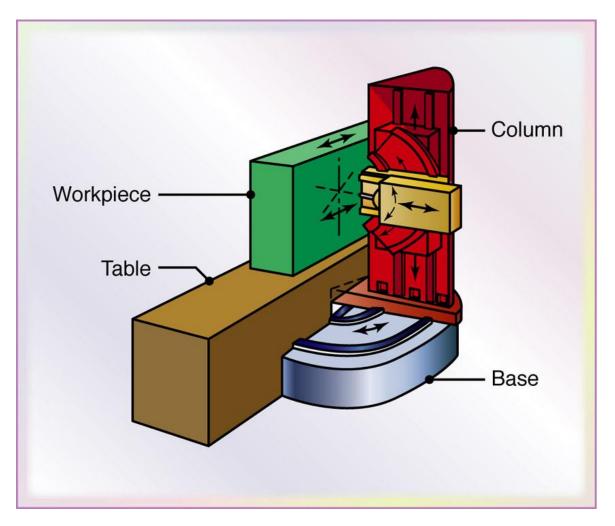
Schematic illustration of a five-axis profile milling machine. Note that there are three principal linear and two angular movements of machine components.
